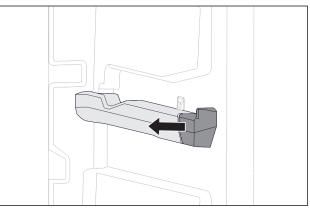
Attachment on the right molded rib ► Remove molded rib attachment sideways.
